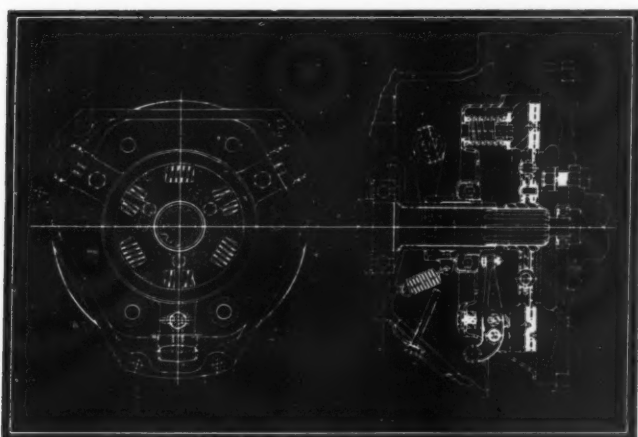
Centrifugal forces give this clutch greater torque capacity at higher motor and slipping speeds
